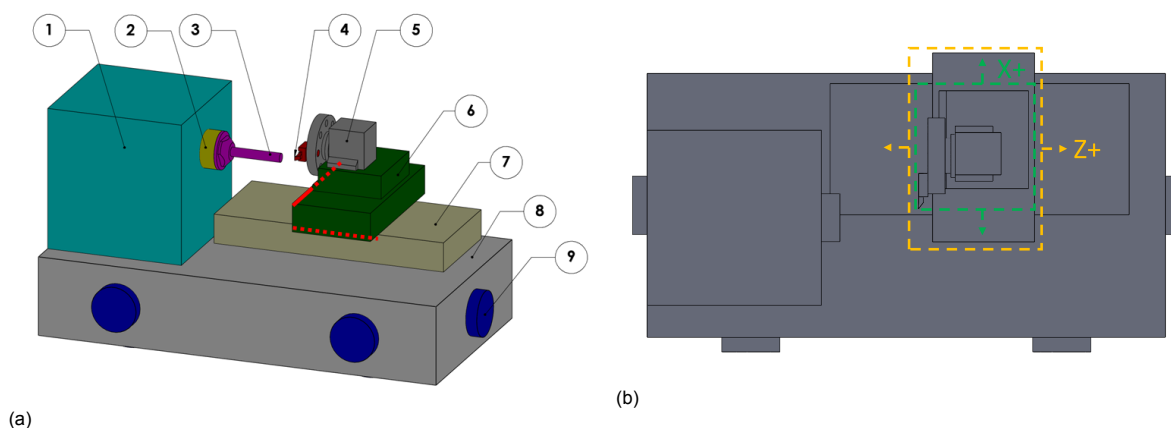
(a) Isometric overview of lathe components: 1) Headstock 2) Main spindle 3) Workpiece 4) Cutting tool 5) Toolchanger 6) X axis 7) Z axis 8) Granite base 9) Rubber vibration damper. X and Z linear encoders indicated by red lines (b) Top view of lathe movement directions: X (lateral) and Z (axial)
